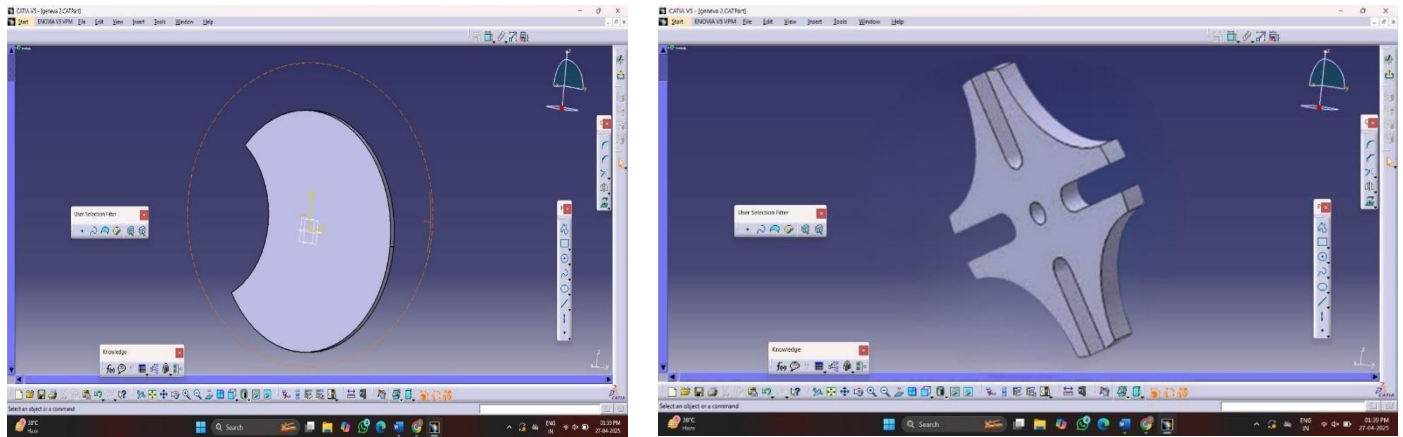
CATIA designs of Crank Wheel & Geneva Wheel
